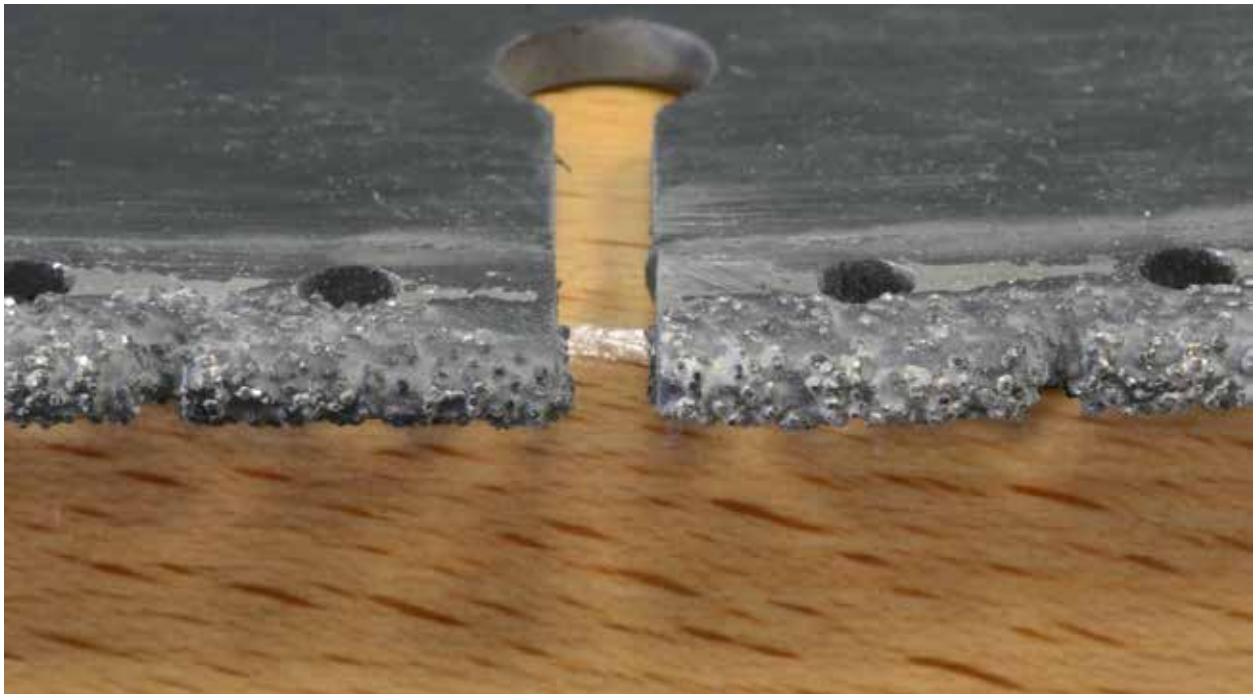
Diamond Saw Blade, G3, Dry Cuts
